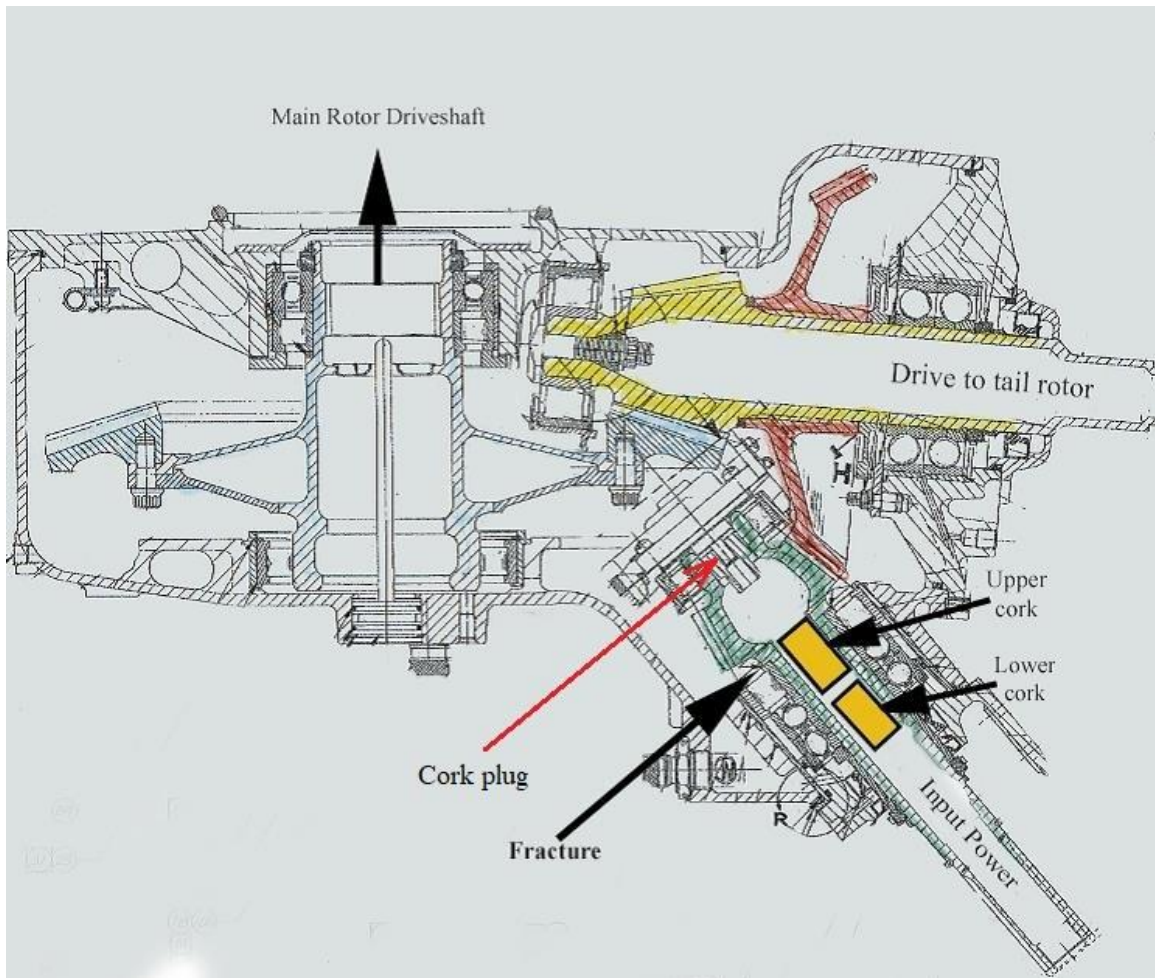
Drawing showing the main gearbox structure. The input pinion is shown in green. The black arrows show the fracture and the two irregular wine corks. The red arrow points to the bore inside the pinion that had originally been plugged using a natural cork plug. Source: MD Helicopters
